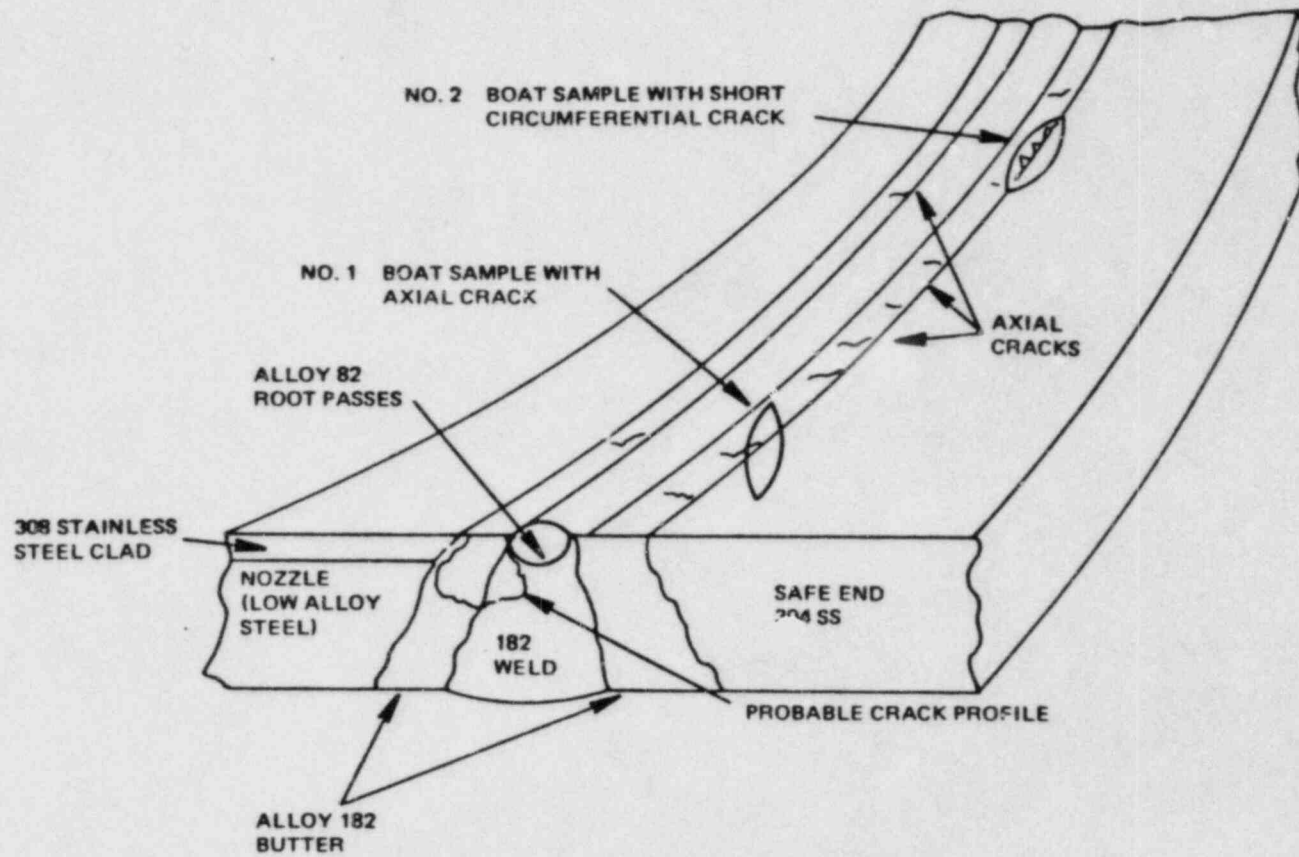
28-Inch Recirculation Outlet Nozzle-to-Safe-End Weld N1-B
